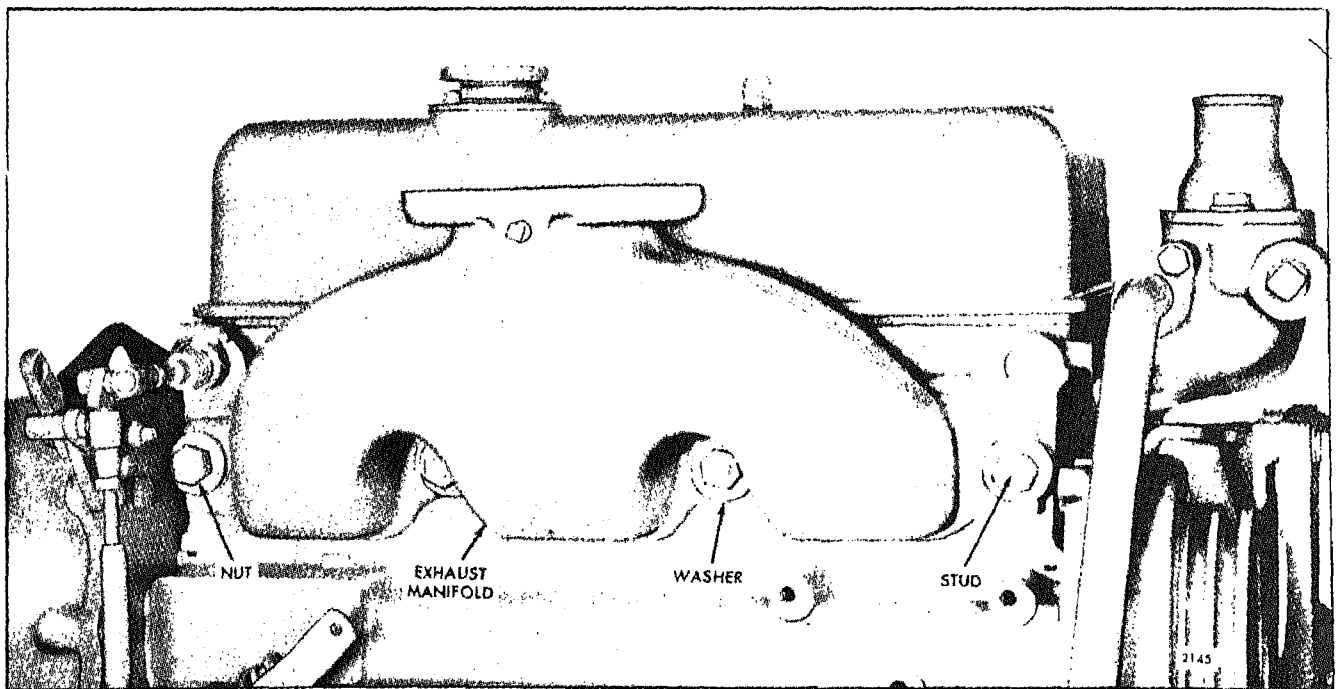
Typical Air-Cooled Exhaust Manifold (Square Flange) Mounting
